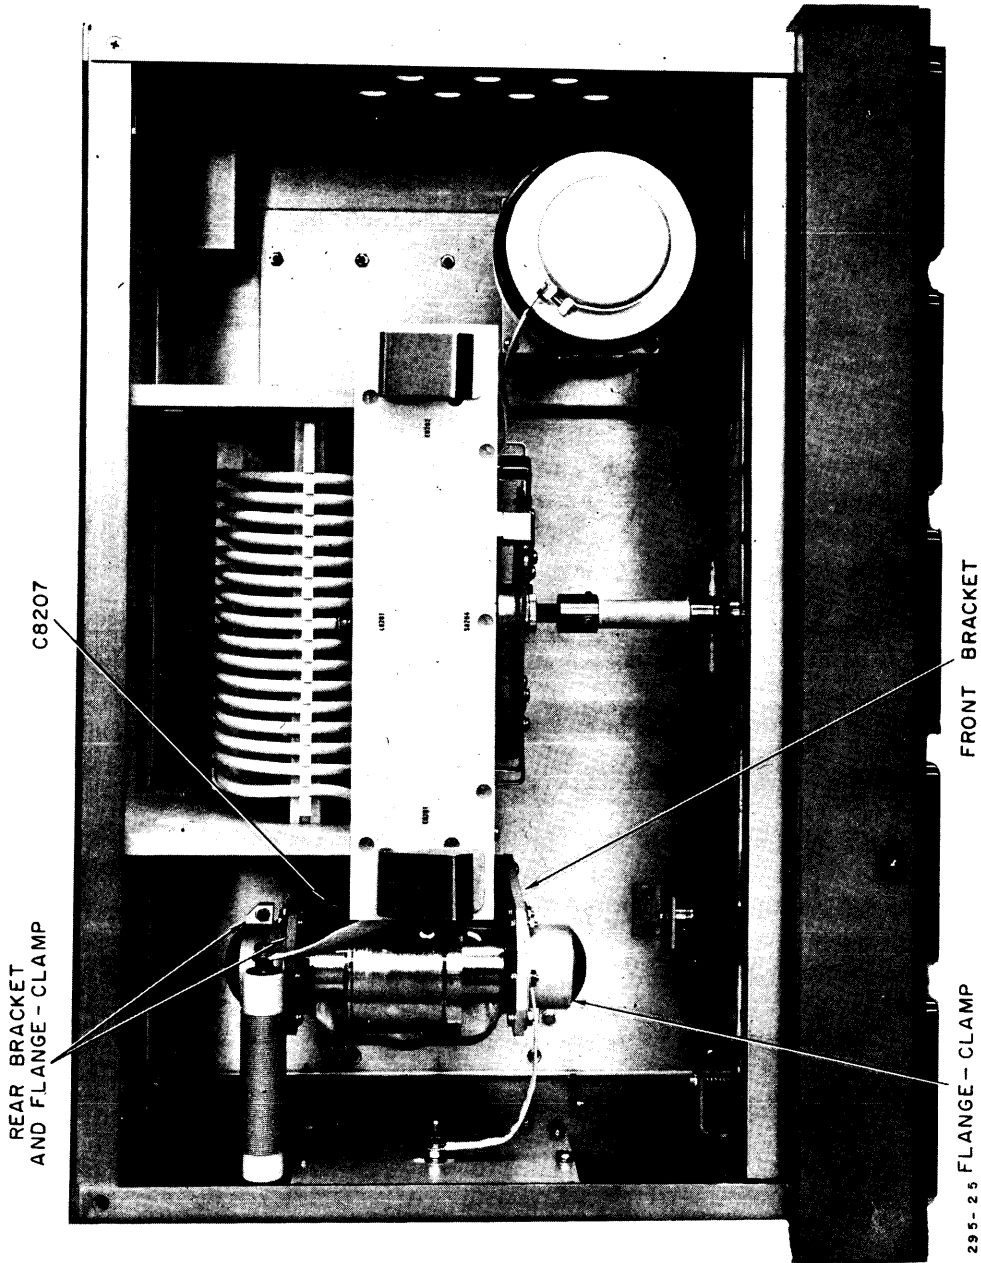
Antenna Tuner Drawer 8200, Top View.
